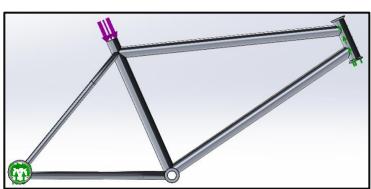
Constraint of the vertical impact case. 2250 N is applied to the seat tube. Fixed support is added at the head tube end and chain stay connector.
